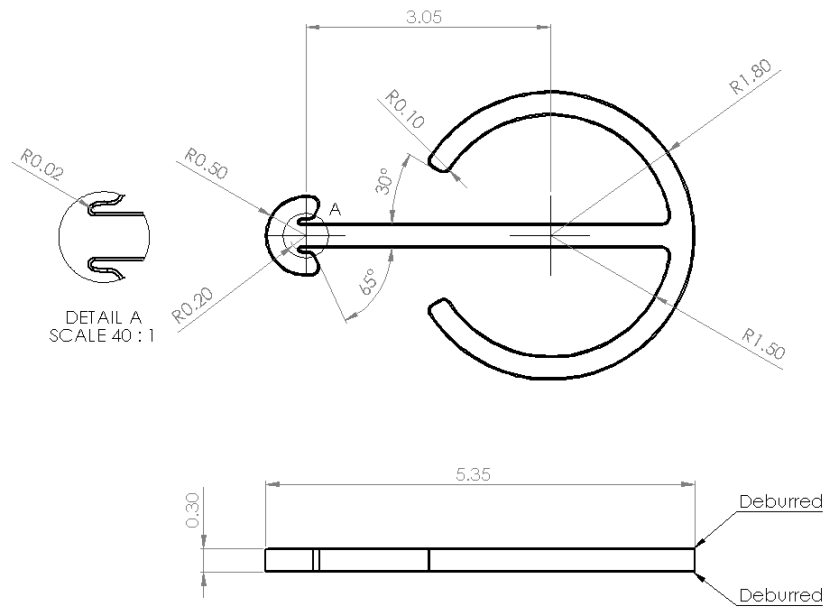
CAD drawing of Concept 2A and 2B: metal forming (laser cutting) before bending. The shaft length is 3 mm in this drawing as an example, while the extra 0.05 mm serves as tolerance for bending. The contour was deburred after laser cutting.
